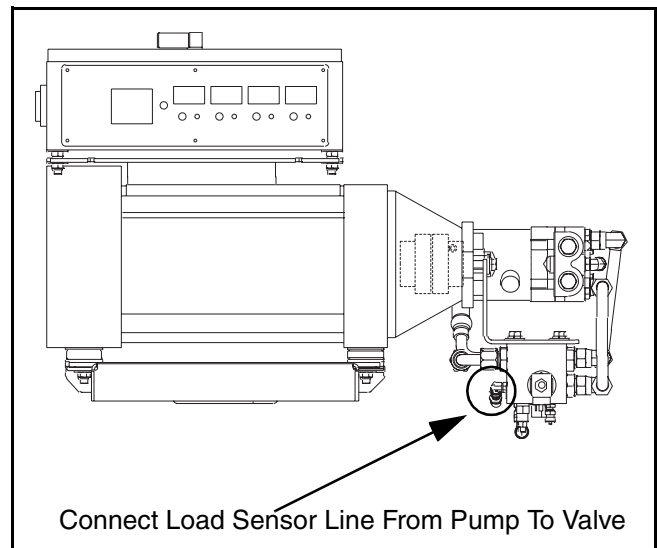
7 Tractor Generator Pump Connection on Screed Generator Drive Motor
